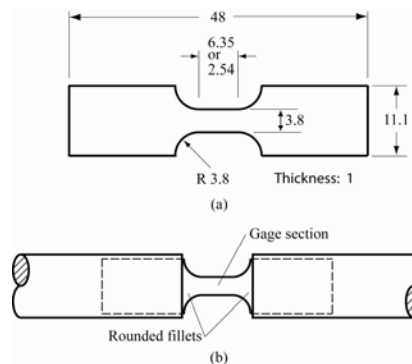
(a) Tensile specimen. (b) Tensile specimen in the SHB apparatus.
